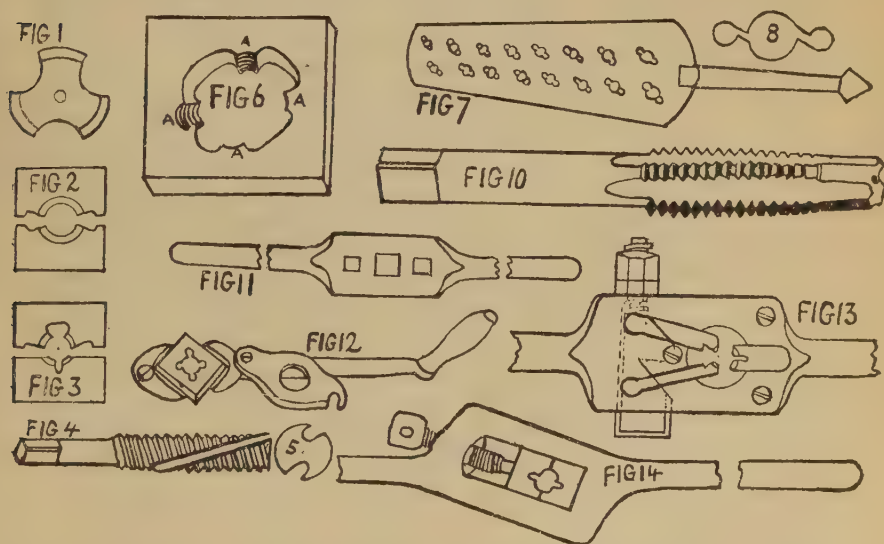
End of Whitworth Tap. 2 & 3—Split Dies. 4 & 5—Hand Fluted Tap. 6—Solid Die. 7—Clock Screw Plate. 8—Best shape of hole. 10—Fluted Tap. 11—Tap Wrench. 12—Solid Die and Stock. 13—Whitworth Die Stock. 14—Engineers' Die Stocks.
